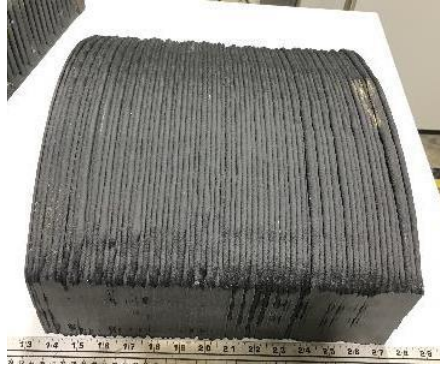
50CF-PPS: 355.6 mm × 355.6 mm × 203.2 mm (14" × 14" × 8") mold substrate, printed with the BAAM system with 0/90 infill pattern. Printing parameters:- bead width: 13.97 mm, bead height: 5.08 mm.
